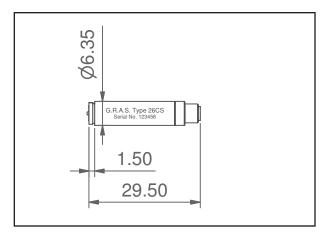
Main dimensions given in millimeters; scale: 1:1
